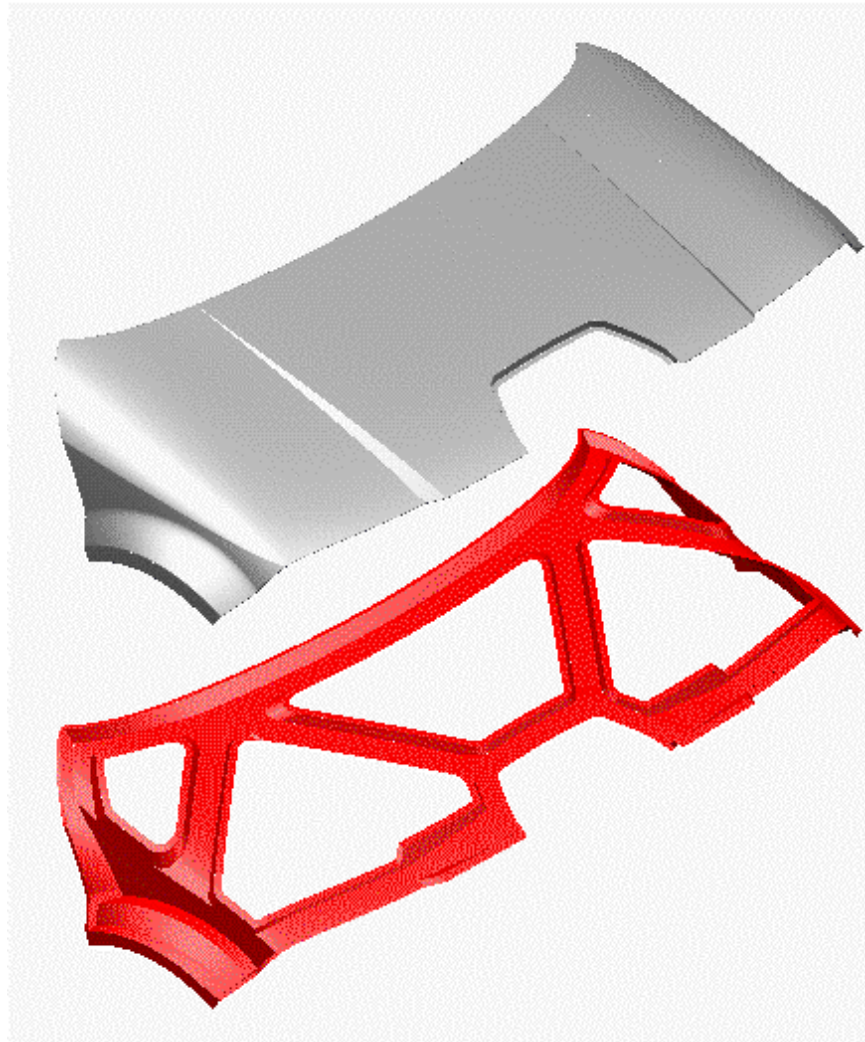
Exploded view of C-Class & PNGV-Class hood structure
